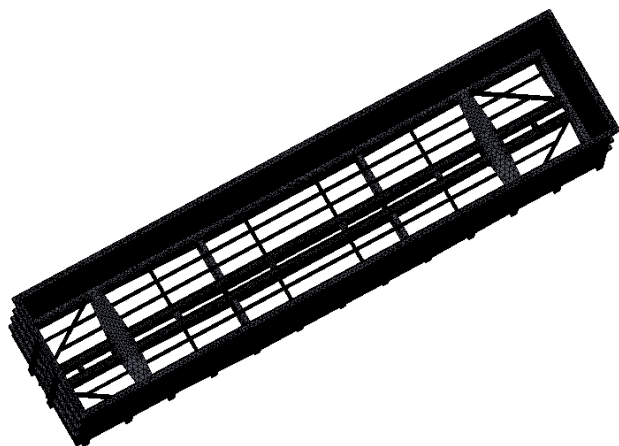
FEM of the improved bearing structure of the flat wagon for carrying industrial woodchips
